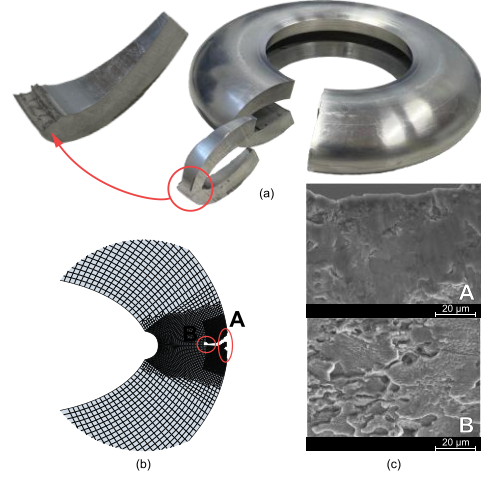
(a) Picture of the barreled ring specimen after cracking, (b) finite element predicted onset and propagation of cracks and (c) fractography details disclosing crack opening by out-of-plane shear and subsequent propagation by tension.
